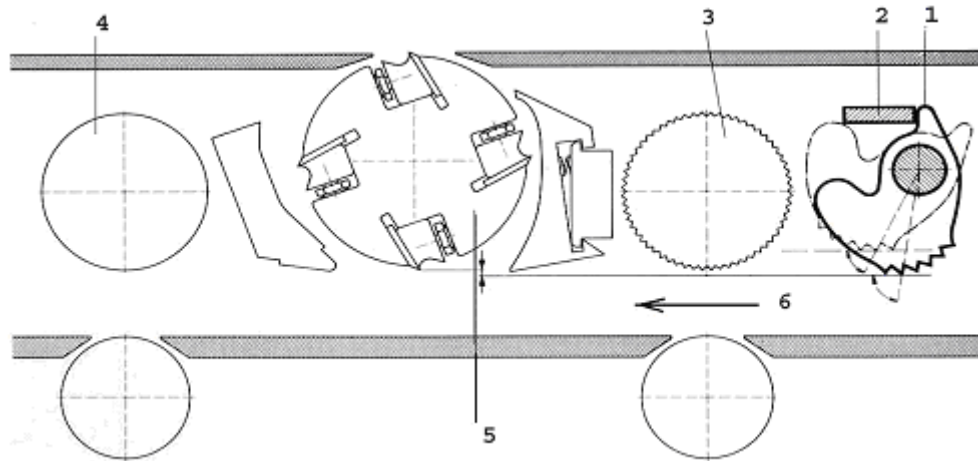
b) — Example of surface planing and thicknessing machine (set up for thicknessing)
